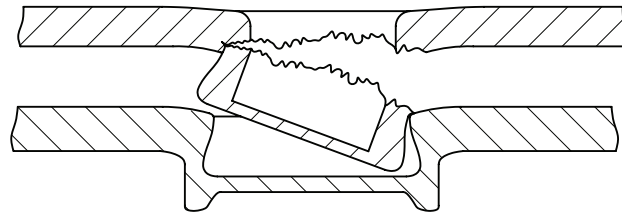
Typical failure modes of solid self-piercing rivet joints under cross-tension load
